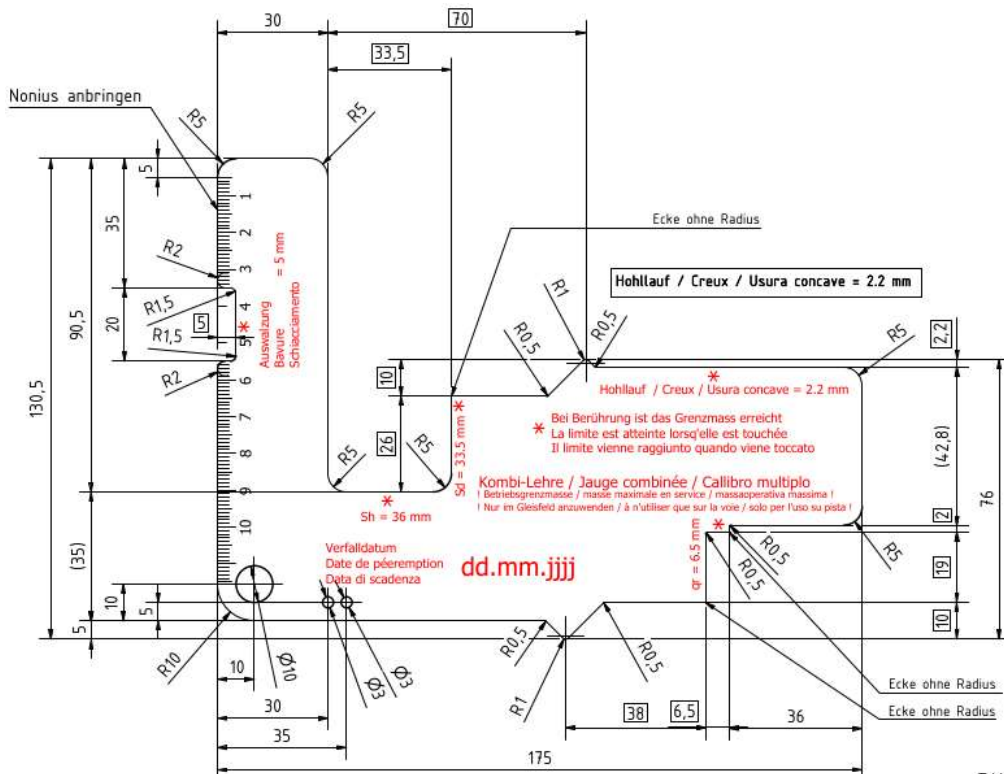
Dimensions of combined gauge for verifying qR, Sd, Sh, including projections and false flanges
